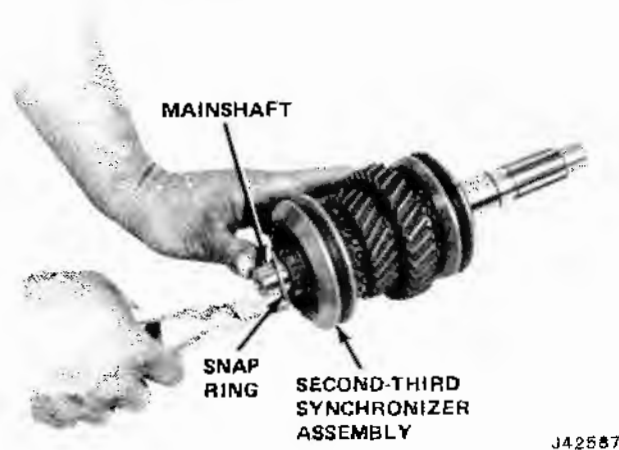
Second-Third Clutch Hub Snap Ring Removal and Installation
